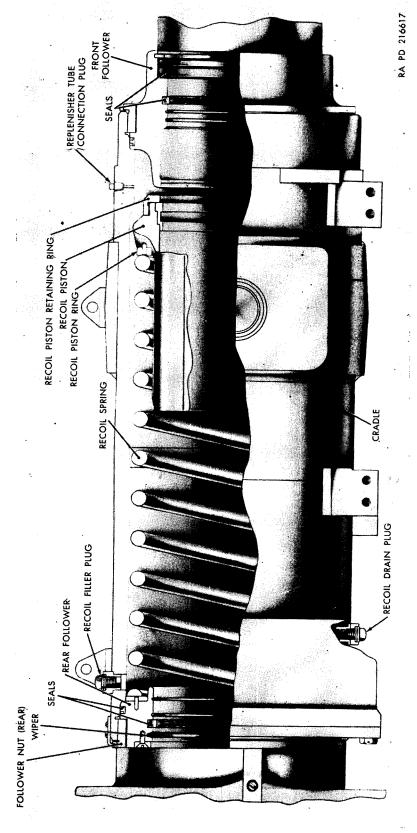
105-mm howitzer mount M85-concentric-type recoil mechanism-cutaway view.
